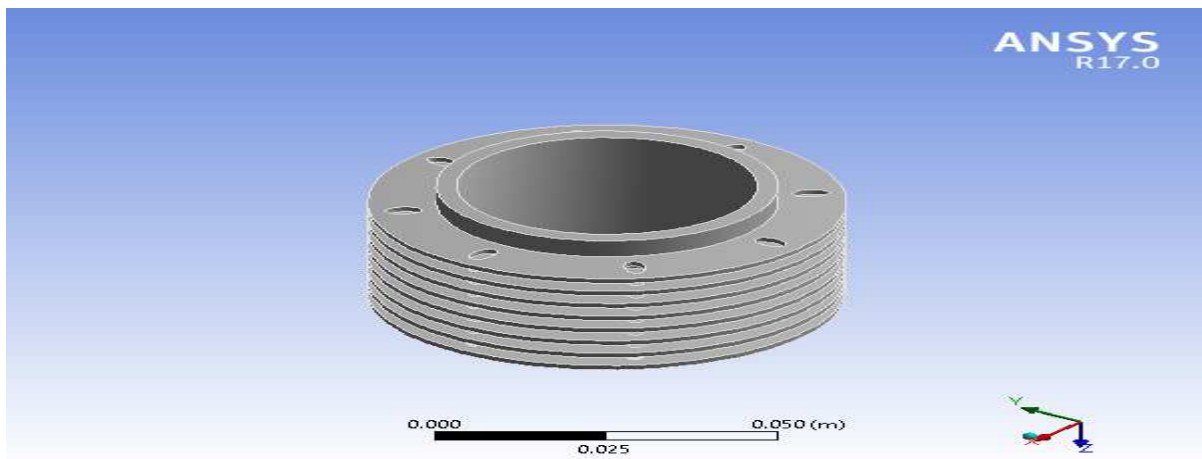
The geometrical model of engine cylinder fin with an elliptic hole (proposed design)
